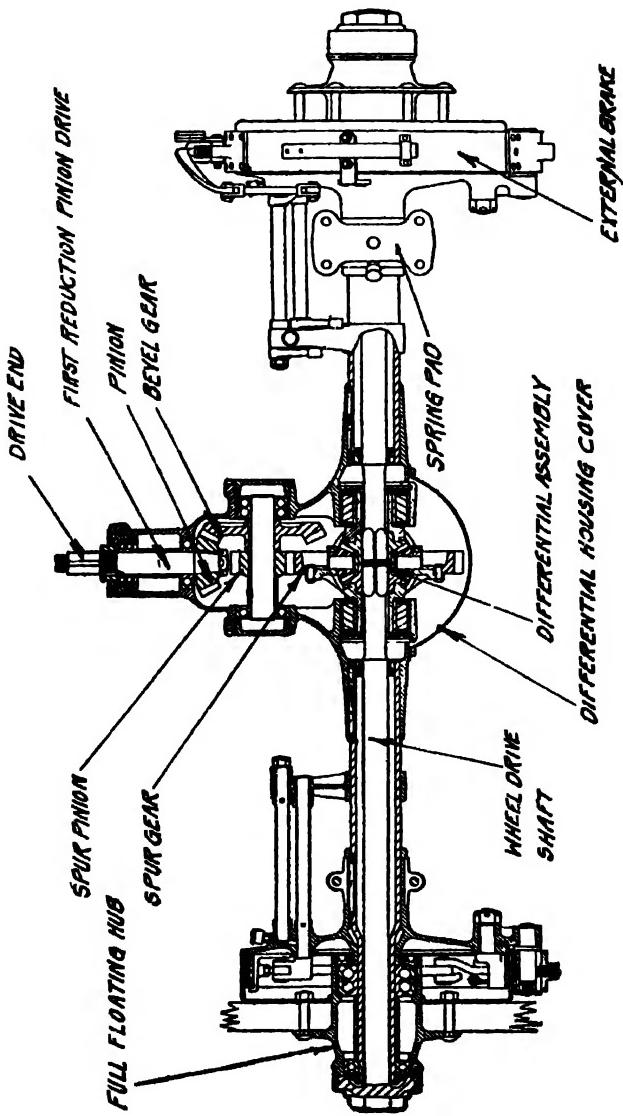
Sectional View of Weston-Mott Double Reduction Full Floating Rear Axle.
